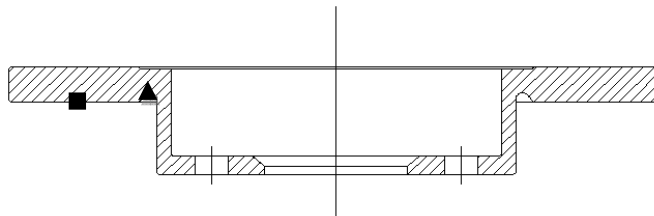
THERMOCOUPLE LOCATION FOR SOLID ROTORS
